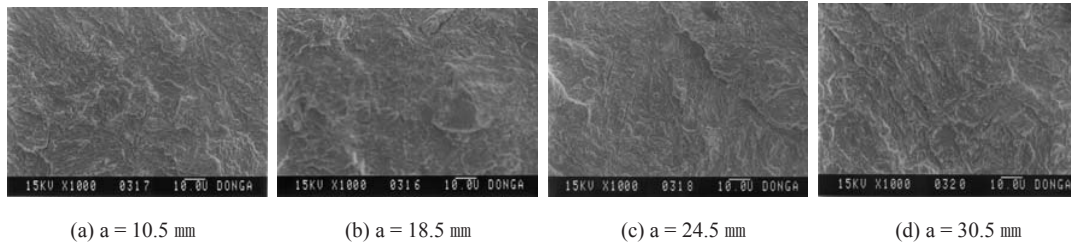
SEM fractography for fatigue fractured turbine blade (a : distance from fractured turbine blade).
